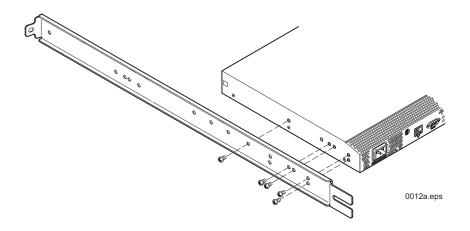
Attaching the Inner Rails to a SAN Switch 2/16V
